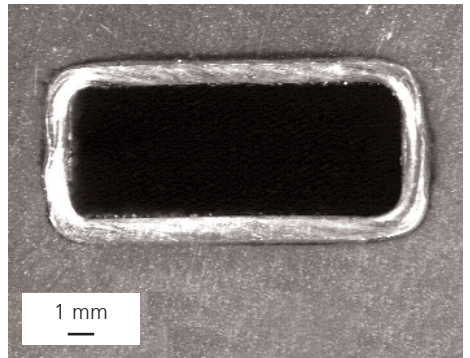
Welded duct-bottom-joint on an exhaust heat exchanger
